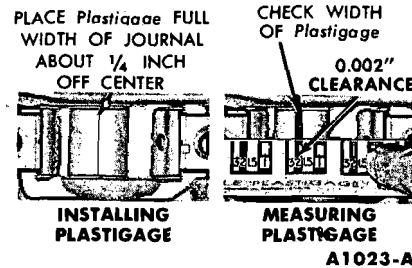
Installing and Measuring Plastigage—Engine on Work Stand
